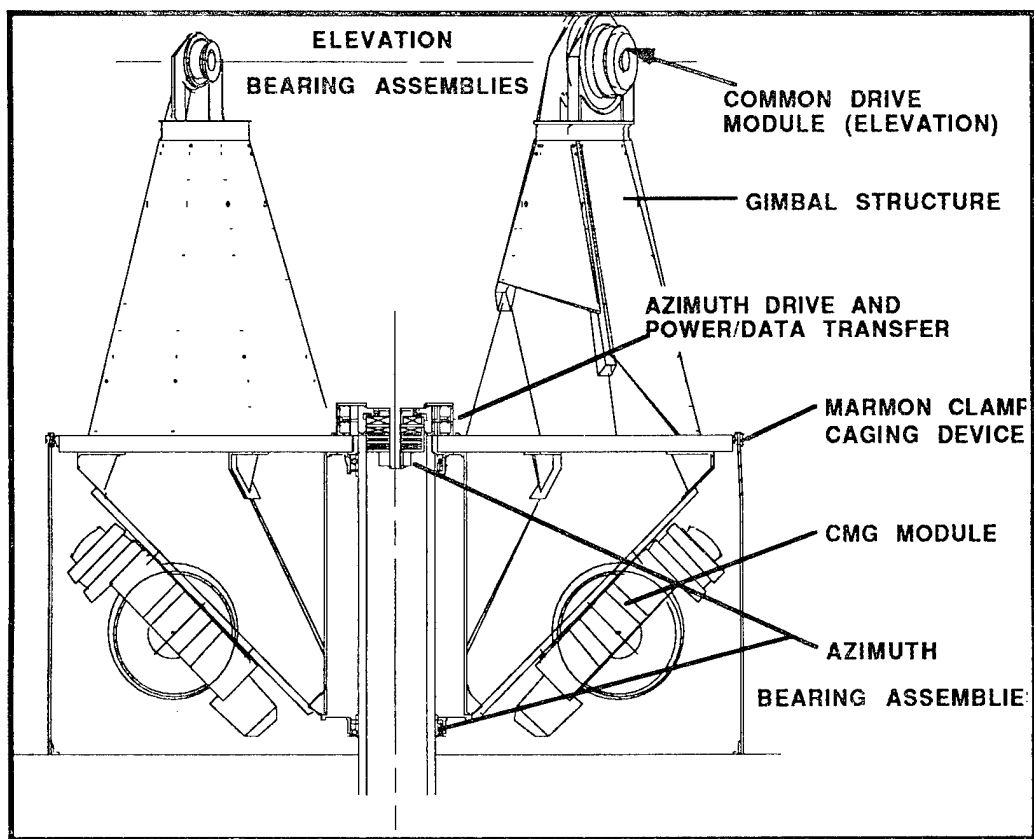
SSTS Gimbal assembly showing azimuth & elevation bearings
